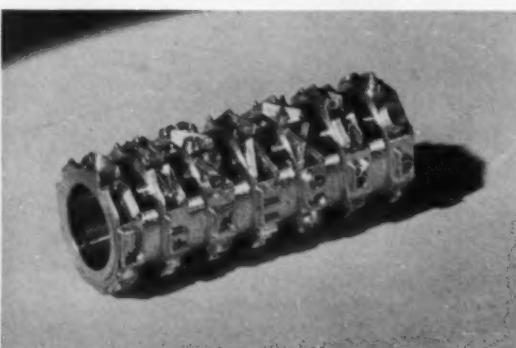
A chromium coating 0.001 inch was deposited on this aluminum printing plate which is engraved with letters. Clear impressions were maintained after 18,000,000 prints. The old product was made of non-magnetic stainless steel and lost clarity after 8,000,000 impressions.
